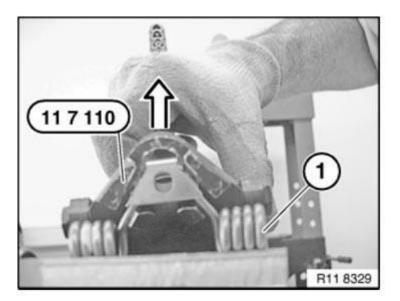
Releasing Special Tool 11 7 110 Courtesy of BMW OF NORTH AMERICA, INC.
